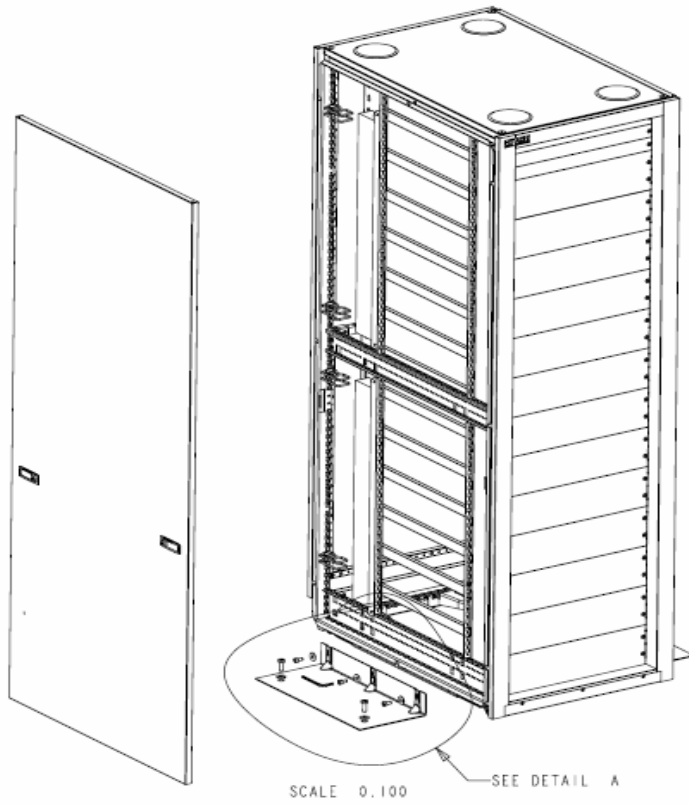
Installing the Side Stabilizer Plates (Detail A)
